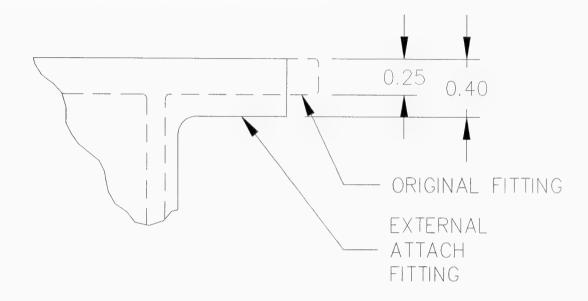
Changed Geometry of Forward Fitting Flanges (Aft Ftg Similar)
